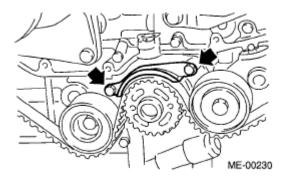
Locating Timing Belt Guide Bolts (1 Of 4) Courtesy of SUBARU OF AMERICA, INC.
